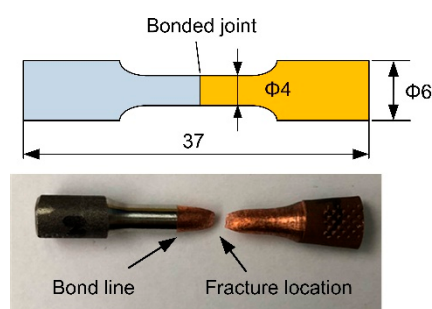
Dimensions (mm) and actual tensile-tested sample, which failed in copper alloy.
